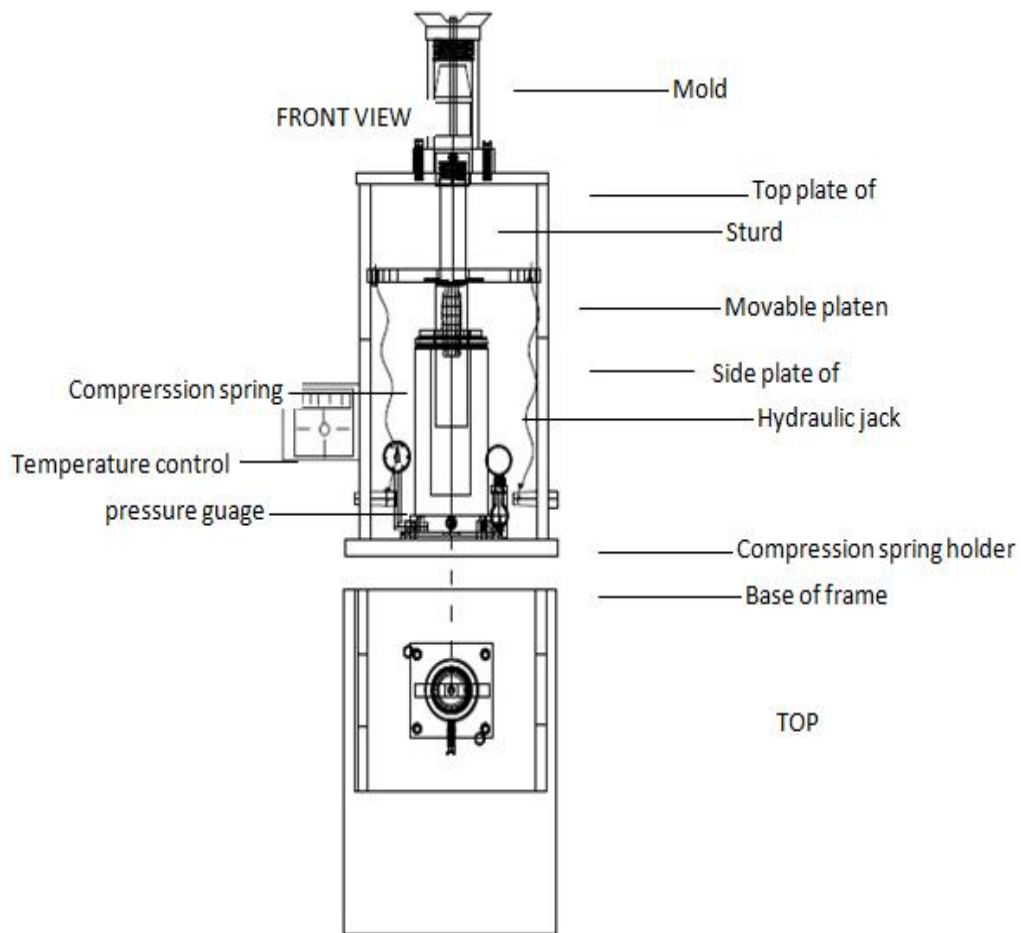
Conceptual Design of Compression Hot Mounting Press Machine
